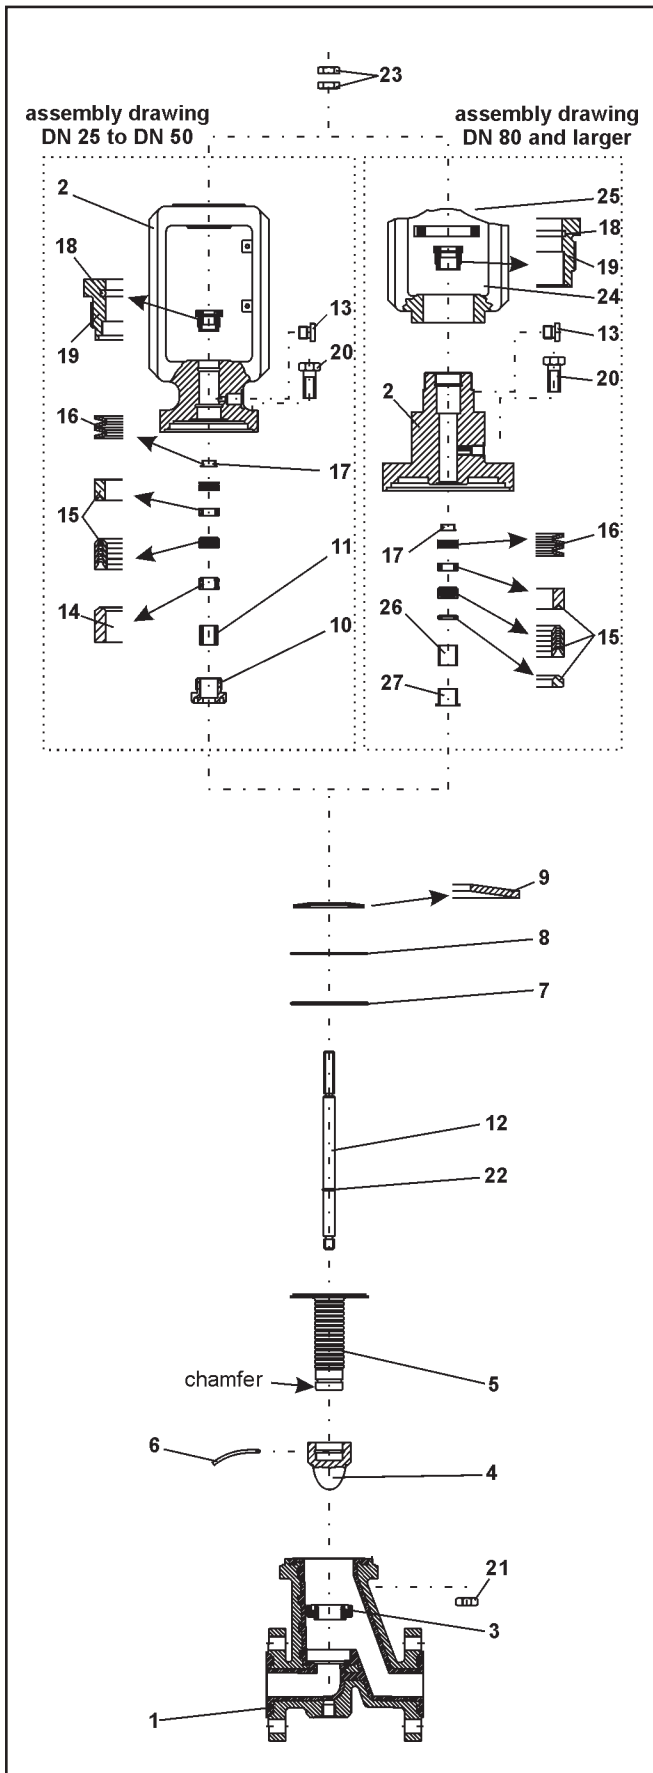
Explosion drawing of control valve, Series 1b, up to construction year 2006
